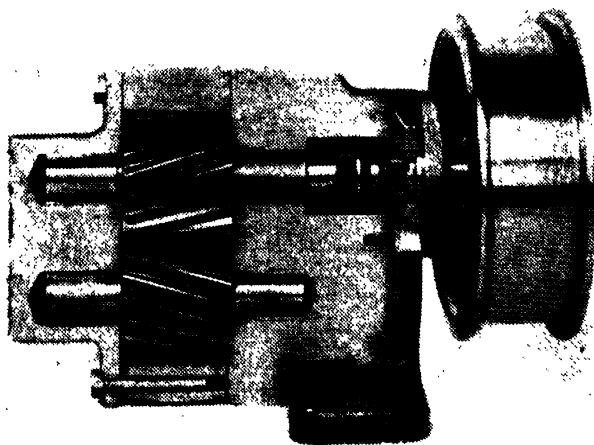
Sectional view of helical-gear pump. (*Brown and Sharpe Mfg. Co., Providence, R.I.*)
